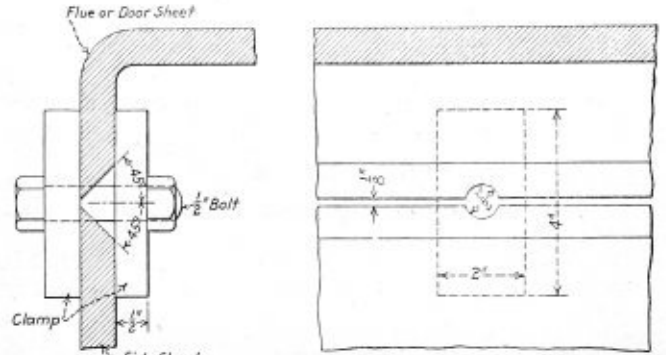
Clamp for Holding Firebox Sheets in Line When Welding
